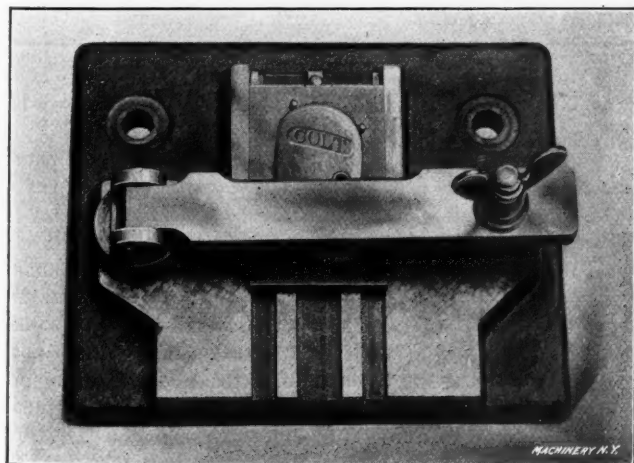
Jig for Holding Pearl Handle for Engraving the Name
